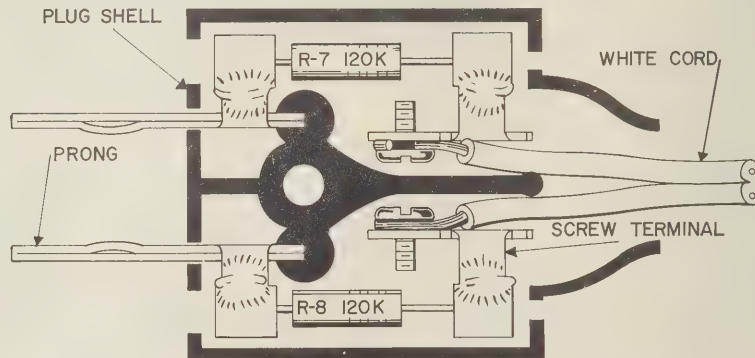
CALIBRATE PLUG ASSEMBLY
